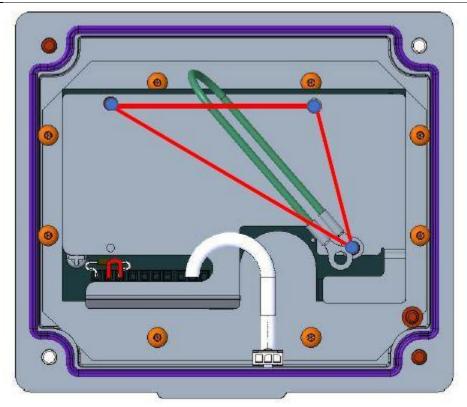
PCB plate sealing configuration / Configuration de l'étanchéité de la plaque PCB
